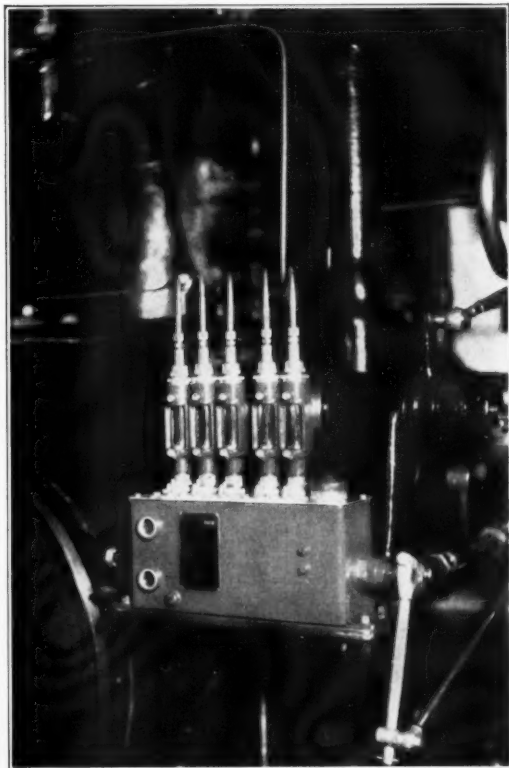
A Manzel 5-feed Mod-194, ratchet drive lubricator installed on a 3-cylinder vertical Skinner Unalloy engine.
